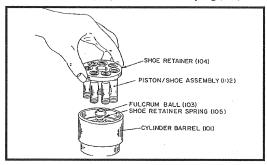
ROTATING GROUP DISASSEMBLY (5V-12015-L).
